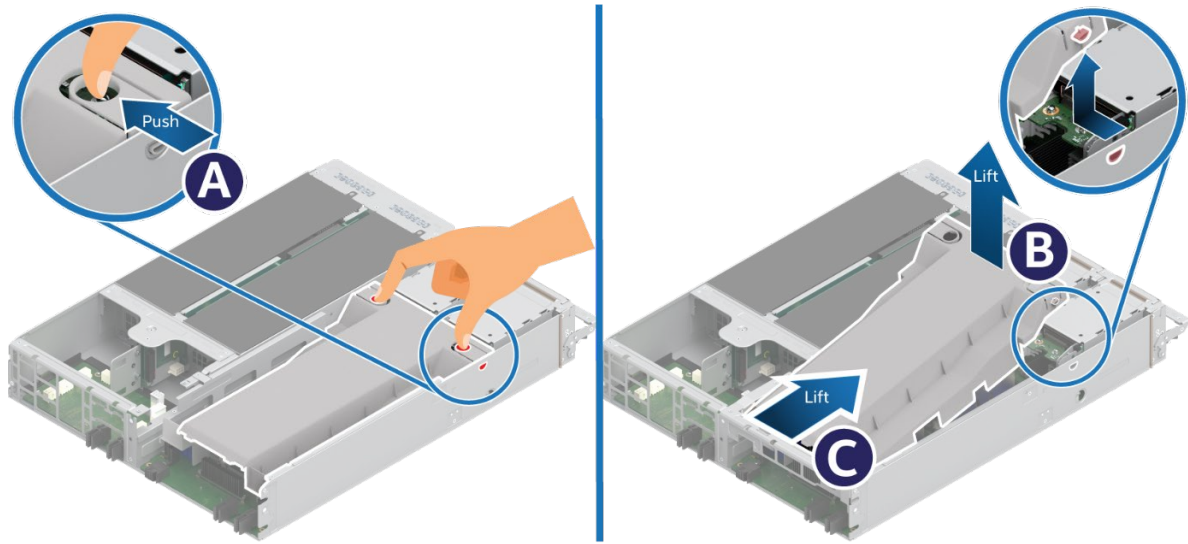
Removing the Air Duct (D50DNP2MFALAC Module)
